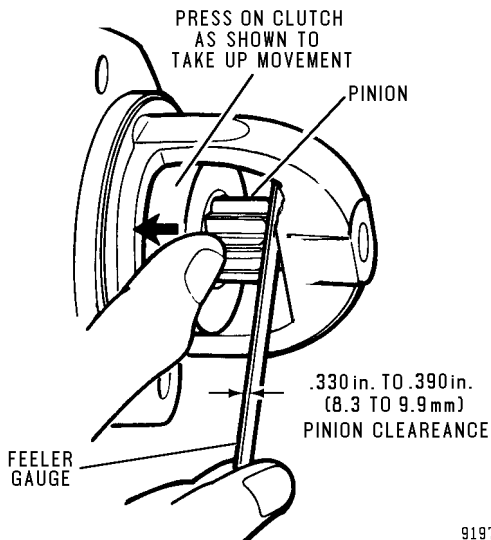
CHECKING PINION CLEARANCE <sup>91976</sup>
